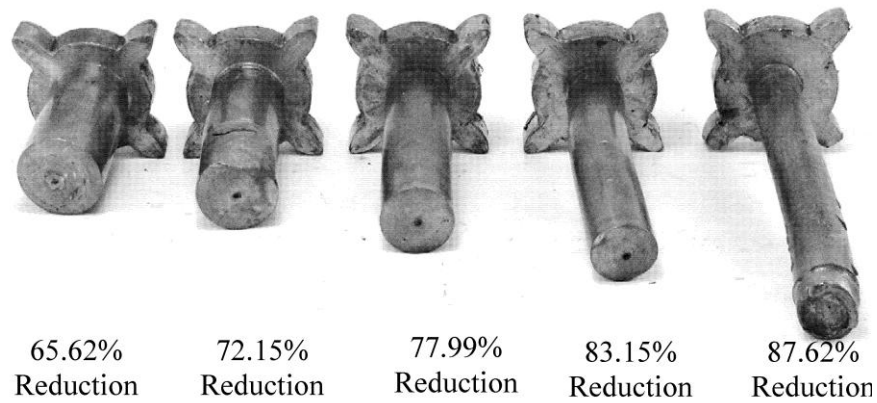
Extruded forward extrusion-forging 4-tooth gear head shaped product
